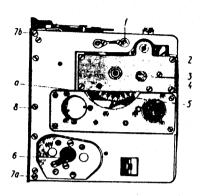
Housing with mechanisms: I sliding bearing 6.261.004; 2—screw 8.903.013; 3—lever 6.351.020; J—exposure time mechanism 5.822.004; 5—gear 8.129.001; 6—gear with rest 6.370.016; 7a, 7b—hushing with ball 6.232.001; δ —screw 8.903.010; a—hole
